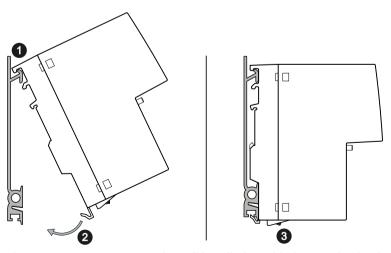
S7-1500 mounting rail installation with the securing bar in the wall mounting position.
